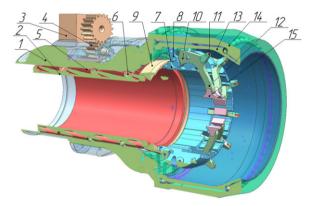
The digital counterpart of the gripper device. (1 - outer tube 1; 2 - inner tube; 3 - stepper motor; 4 - gear transmission; 5 - gear profile, 6 - ball-screw transmission; 7 - gripper housing, pawl - 8; 9 - adapter tube; 10 - finger with ratchet wheel; 11 - roller; 12 - bearings; 13 - clip; 14 - cone; 15 - soft sponge).
